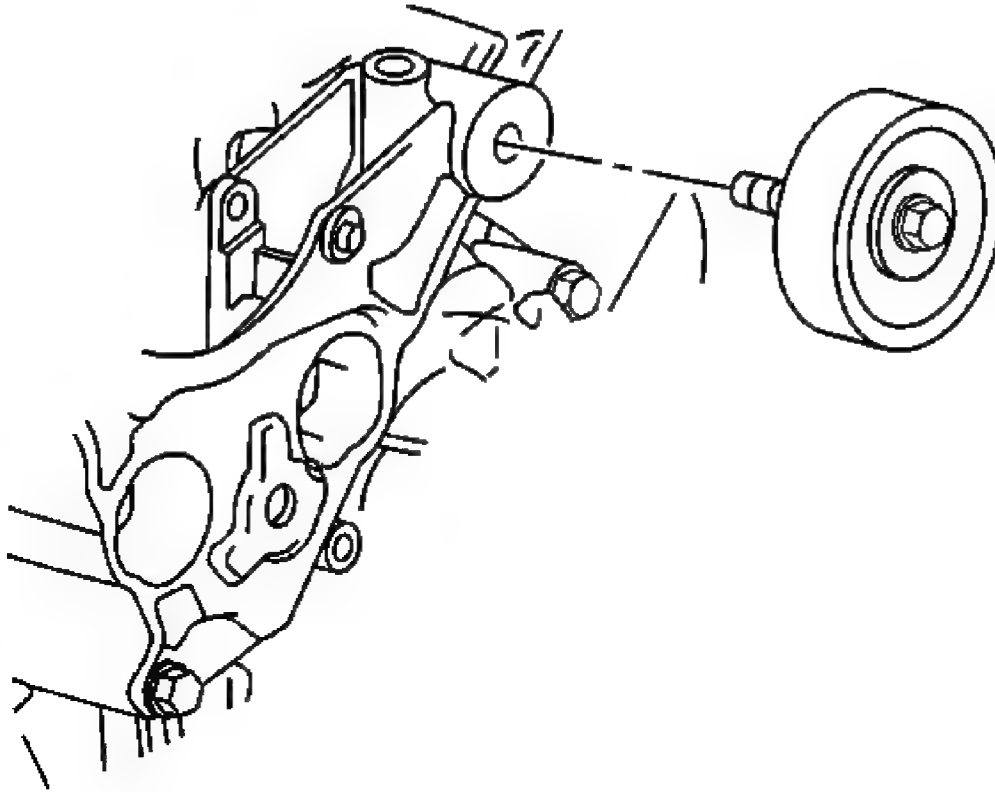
View Of Drive Belt Idler Pulley Assembly
